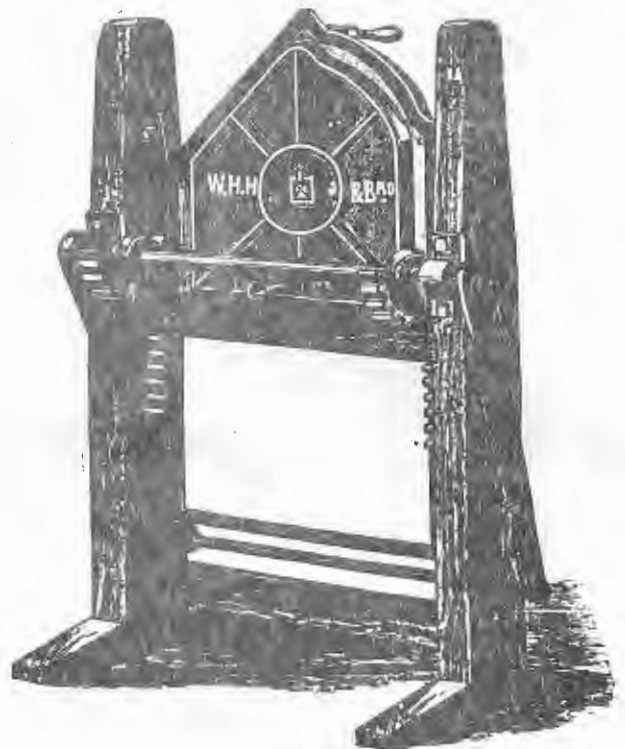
Crimping Machine, W.H. Horn & Bro., "Boston Patent."
